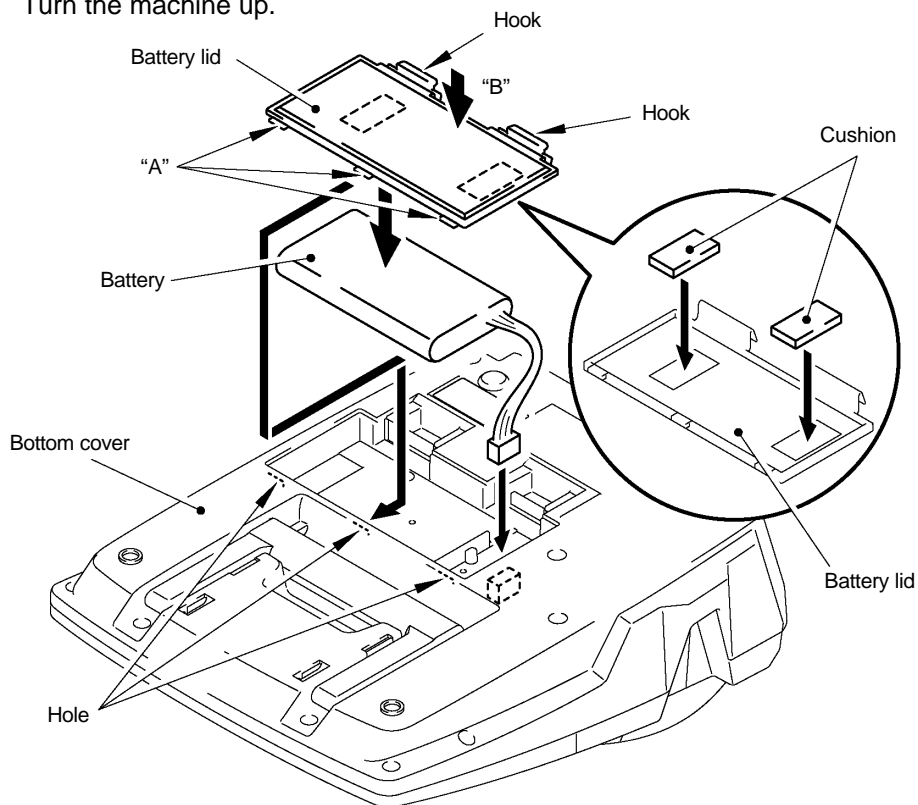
Reassembling the Bottom Cover (2)
